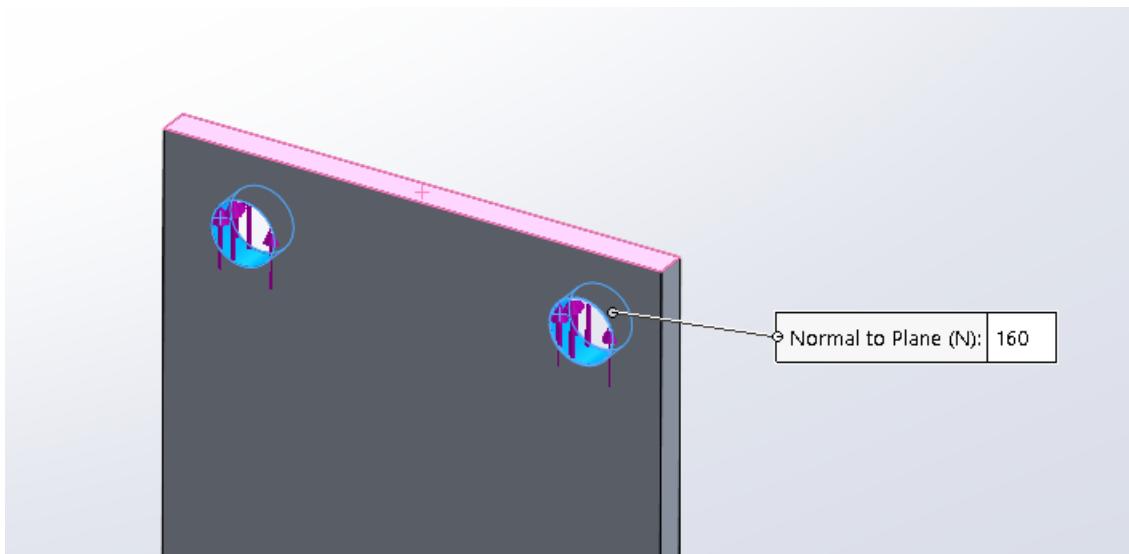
Side Reinforcement Plate; FEA; Applied Load
